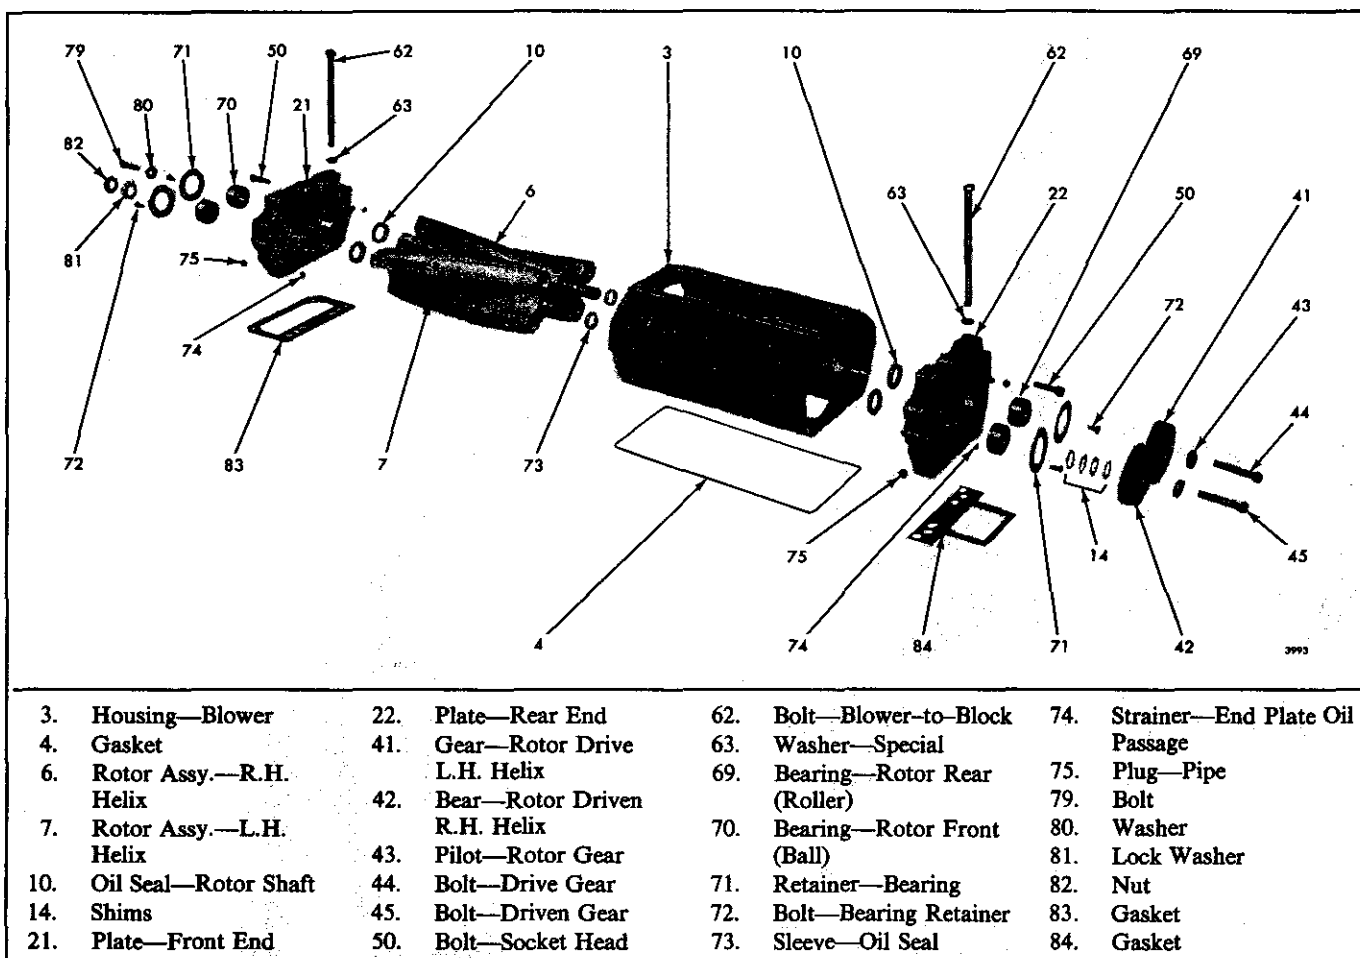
Blower Details and Relative Location of Parts (8V-53) (Former Blower)
